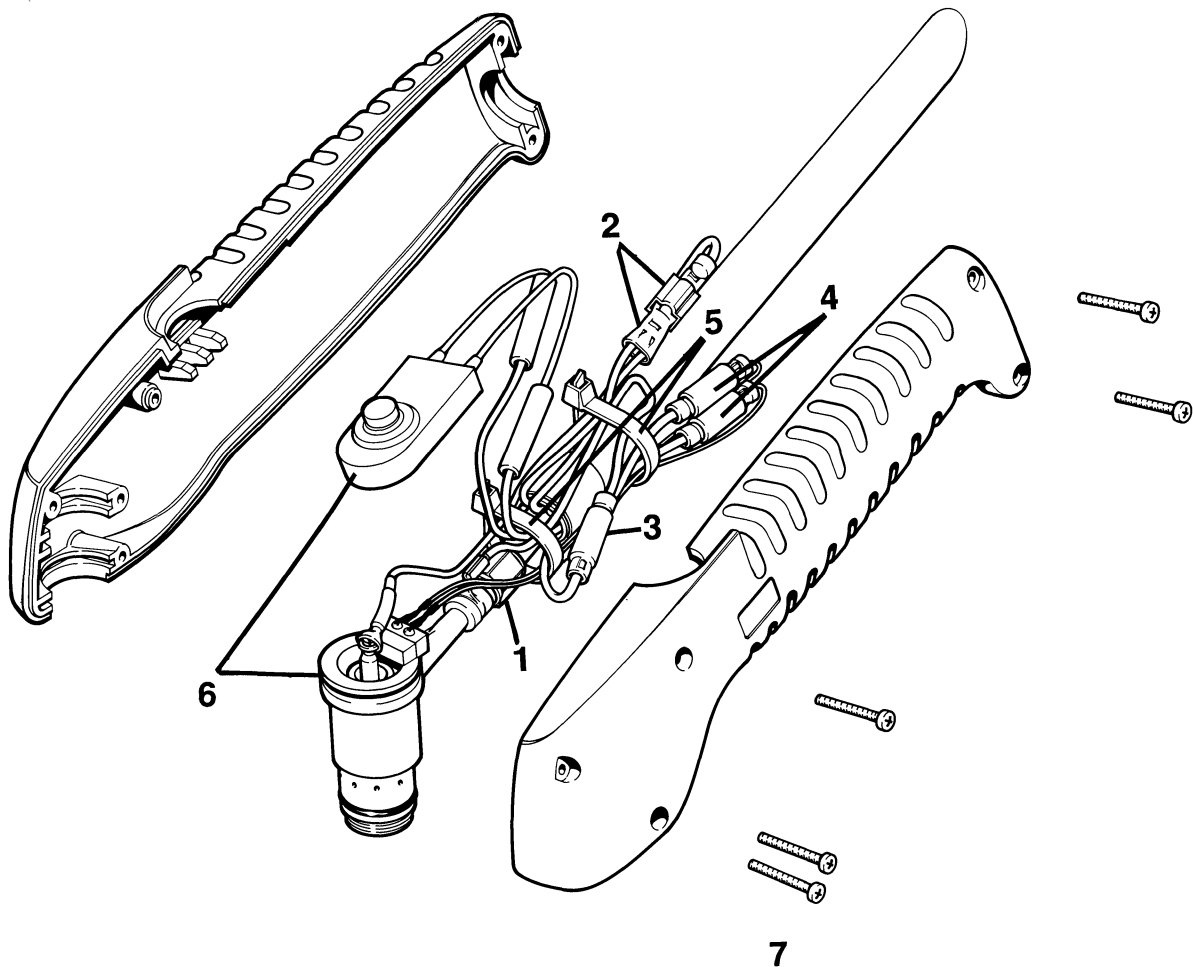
PAC120 Torch Retrofit Kit Installation (Sheet 1 of 2)
